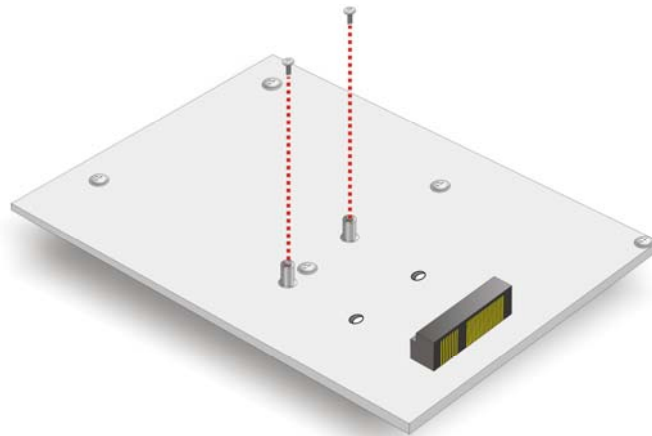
Remove the Retention Screws for the Full-size PCIe Mini Card
